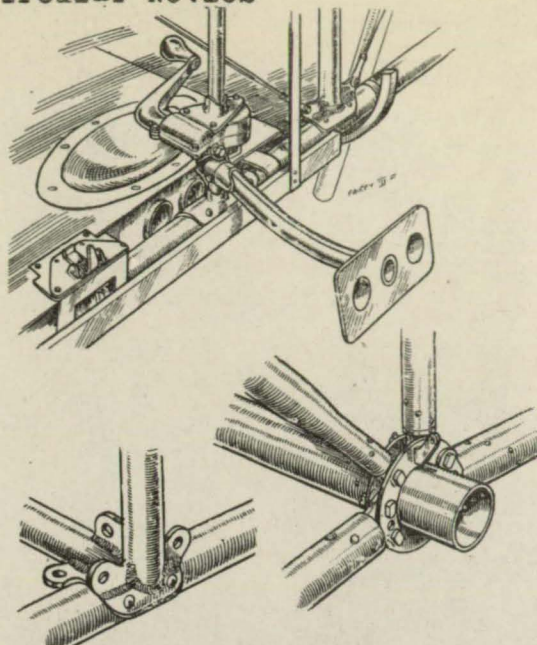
A swivelling bracket for the wireless generator. Below, welded and "spool" joints of the III F.
